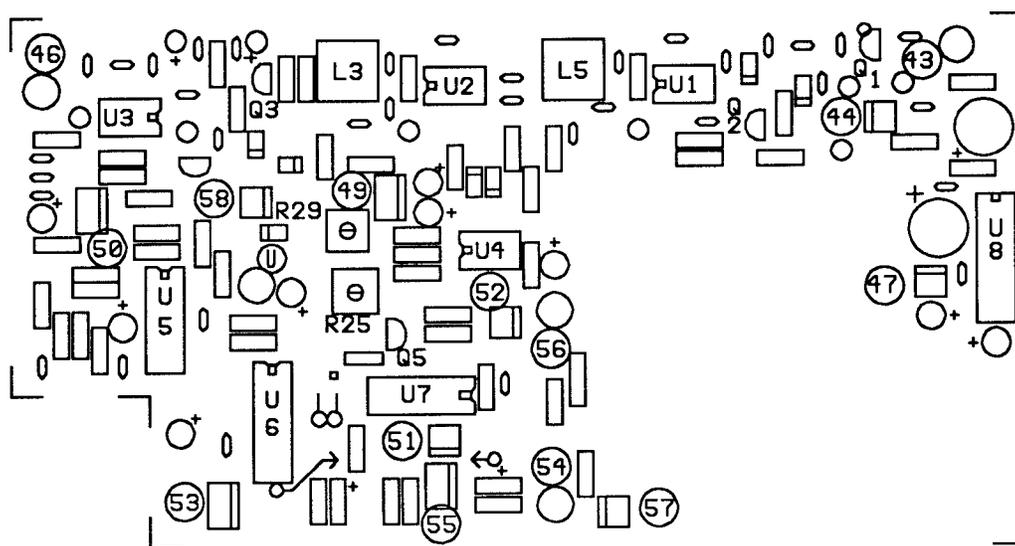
IF/AF BOARD COMPONENT LAYOUT (81602)
